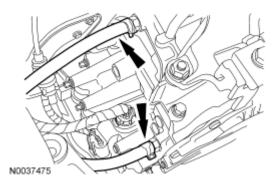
Locating Transaxle Cooler Tubes Courtesy of FORD MOTOR CO.
